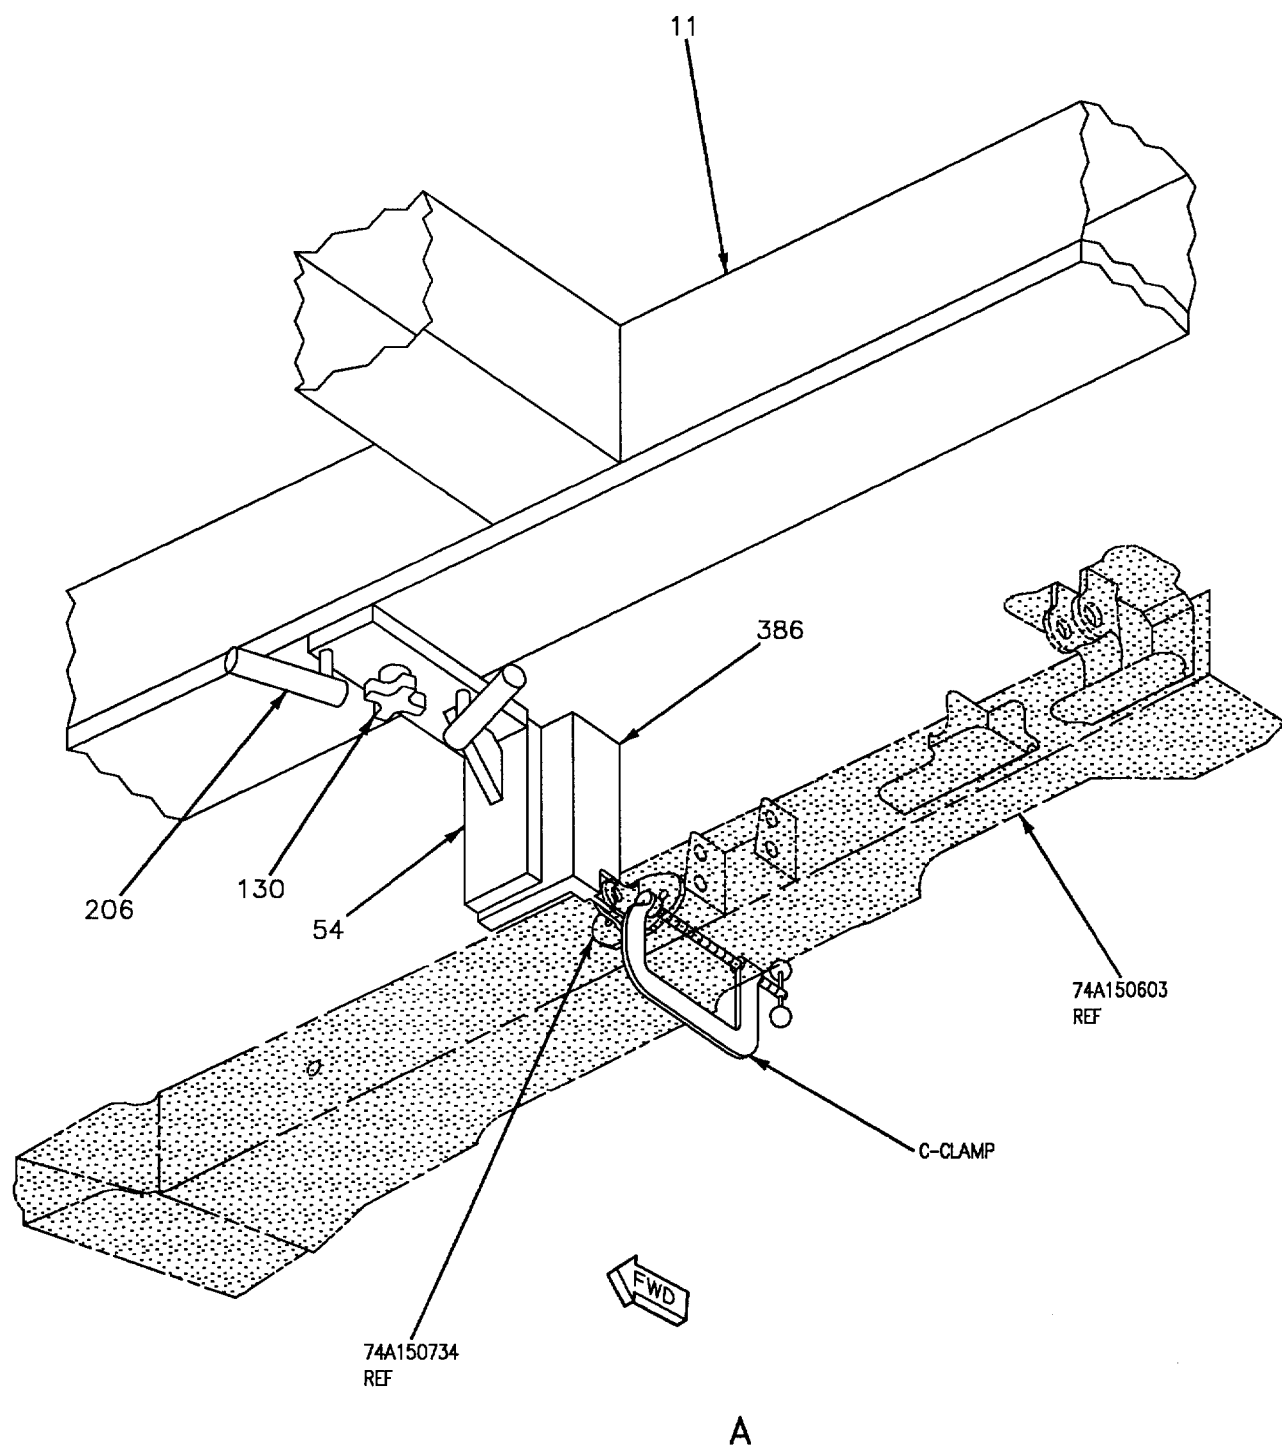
Flap Transmission, Outboard Support (Sheet 1)
